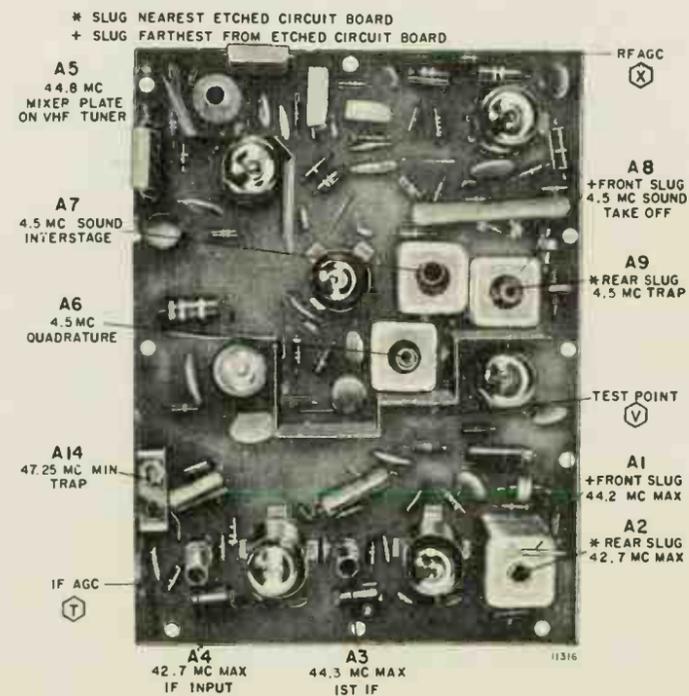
Rear View of Etched Circuit Board A7585-1 (Chassis 15D1B) Showing Test Point Locations and IF Alignment Data.
